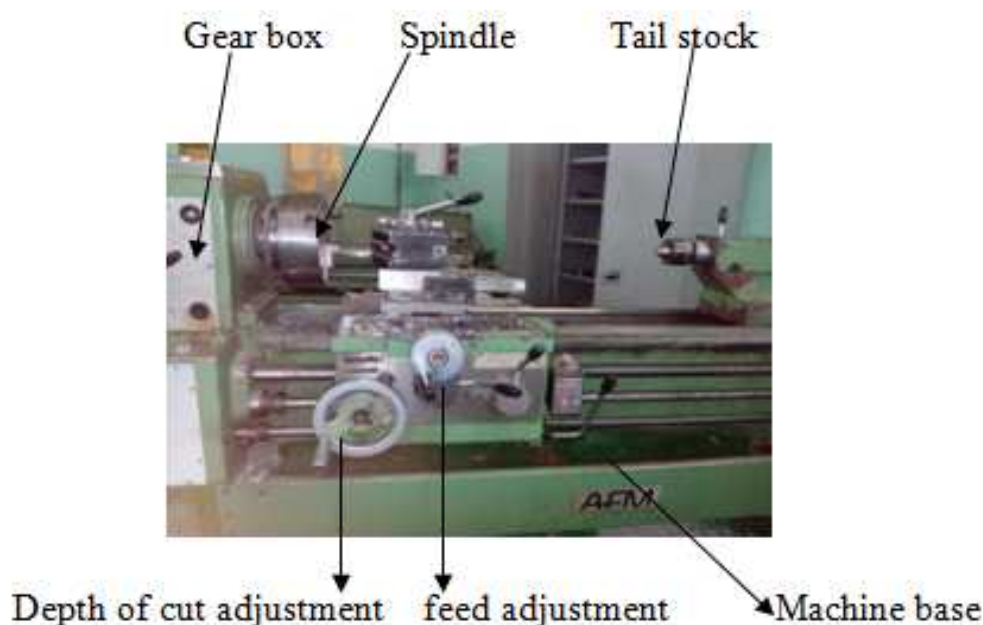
Lathe machine (Manufacturing engineering machine shop)
